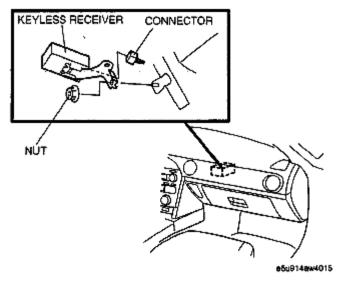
Identifying Keyless Receiver Remove/Install Components (Front) Courtesy of MAZDA MOTORS CORP.
